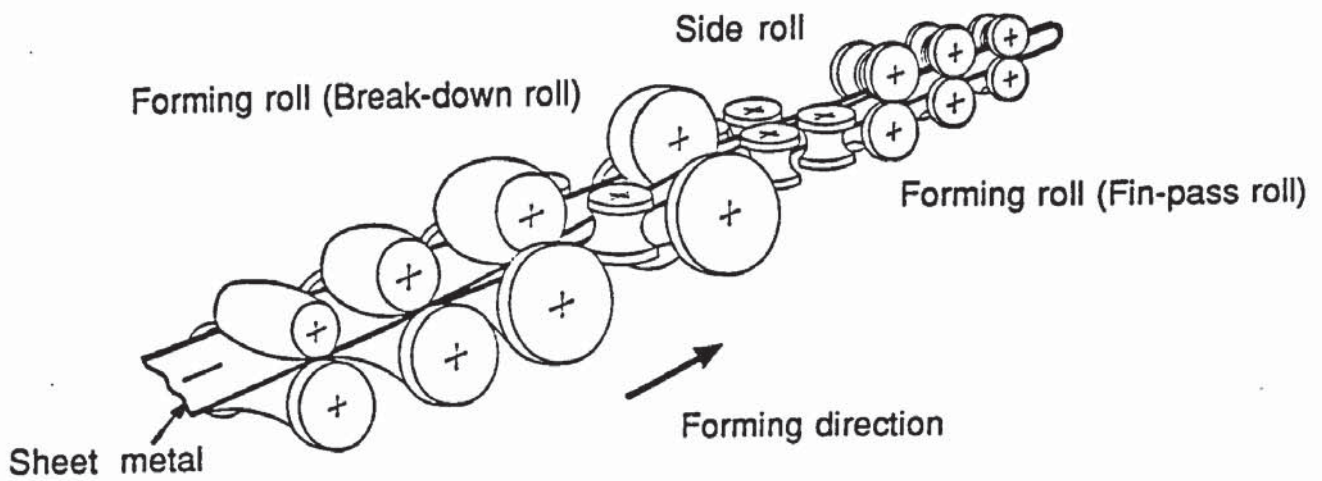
Schematic view of the cold roll-forming process for ERW(Electric Resistance Welded) tube-making
